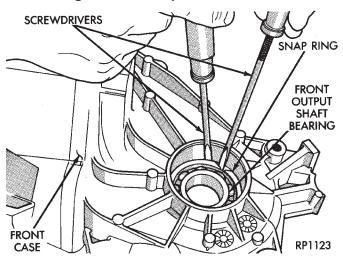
Front Output Shaft Bearing Retaining Ring Removal
